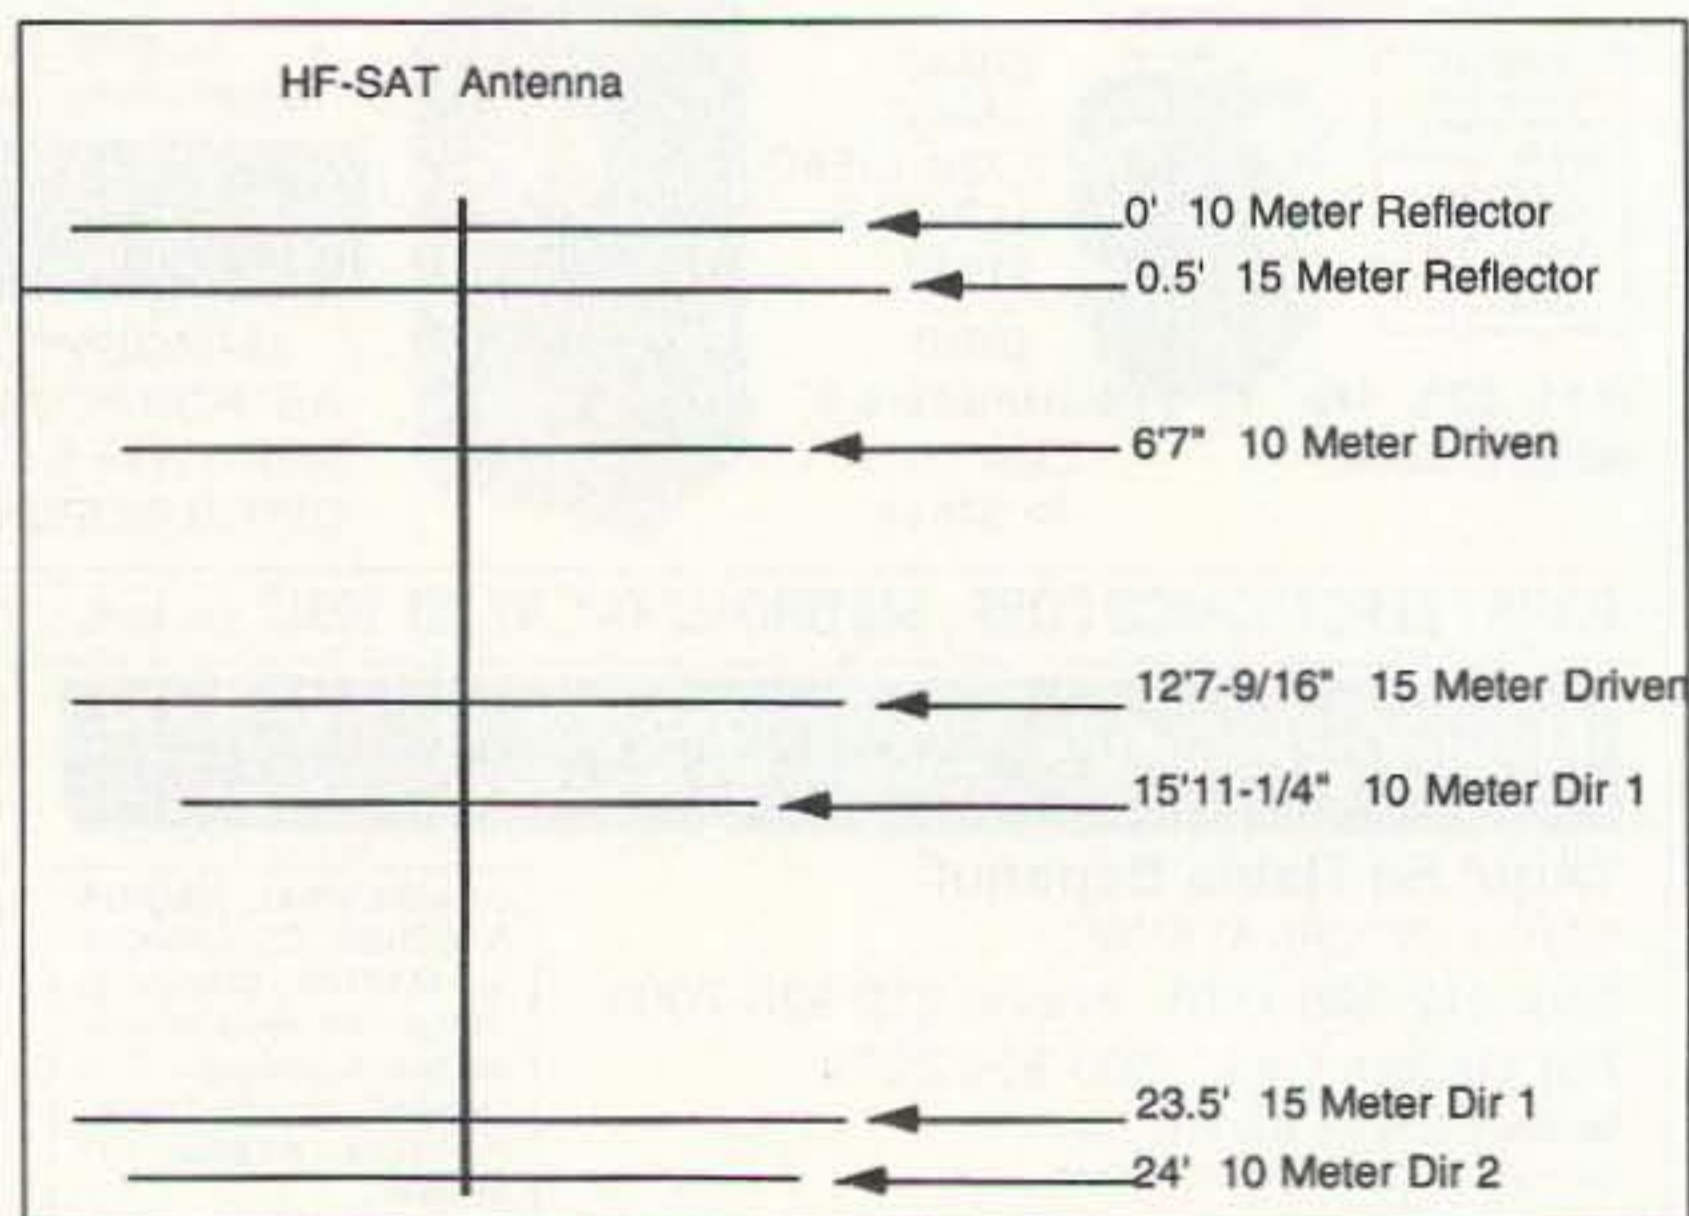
Construction measurements for the HF-SAT Antenna. Dimensions shown indicate element positions on the boom.
